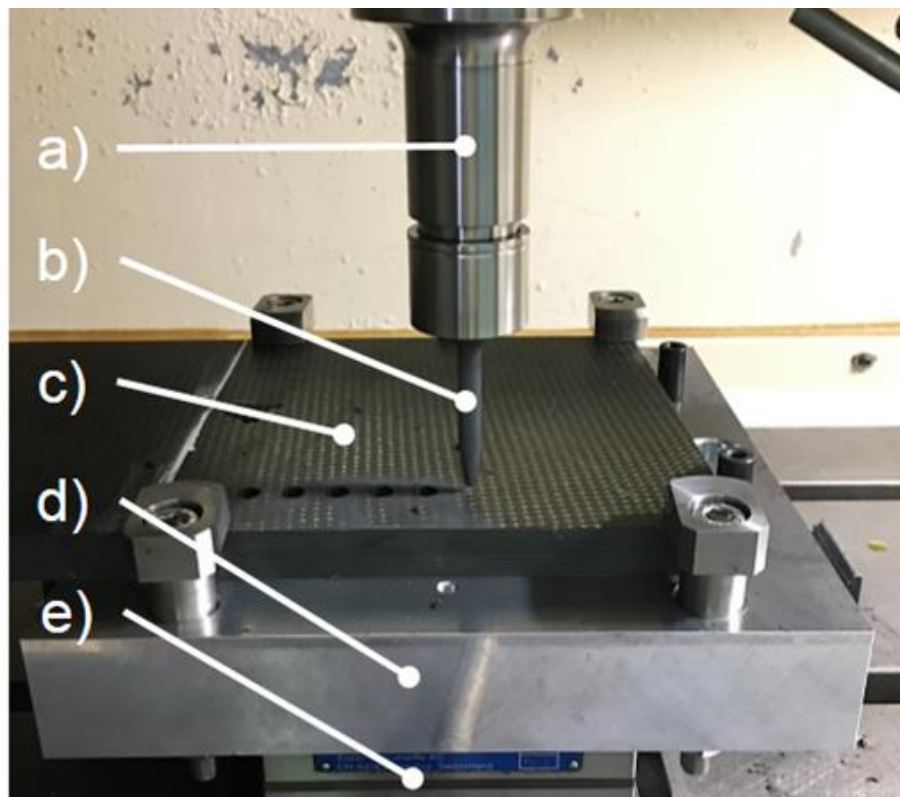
Experimental setup for cutting tests: (a) machine; (b) tested drill; (c) CFRP workpiece; (d) fixture; (e) dynamometer
